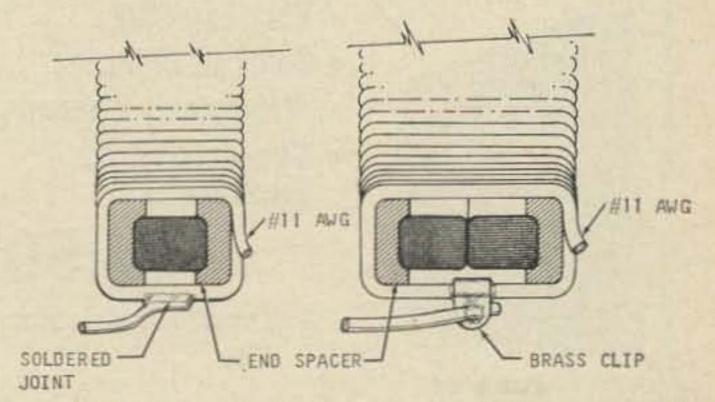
Details of alternate methods for making the tap connections to the toroidal tank coils. Care must be taken to prevent solder from bridging over to the core, thus promoting a flash-over. Excessive heat must be avoided when soldering near the end-spacers so as to prevent their being melted.
